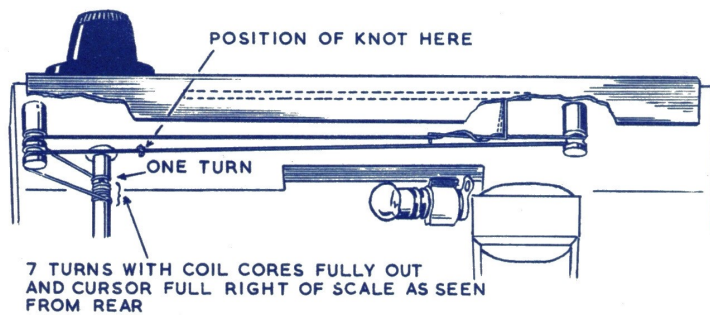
VIEW OF CORD DRIVE MECHANISM
